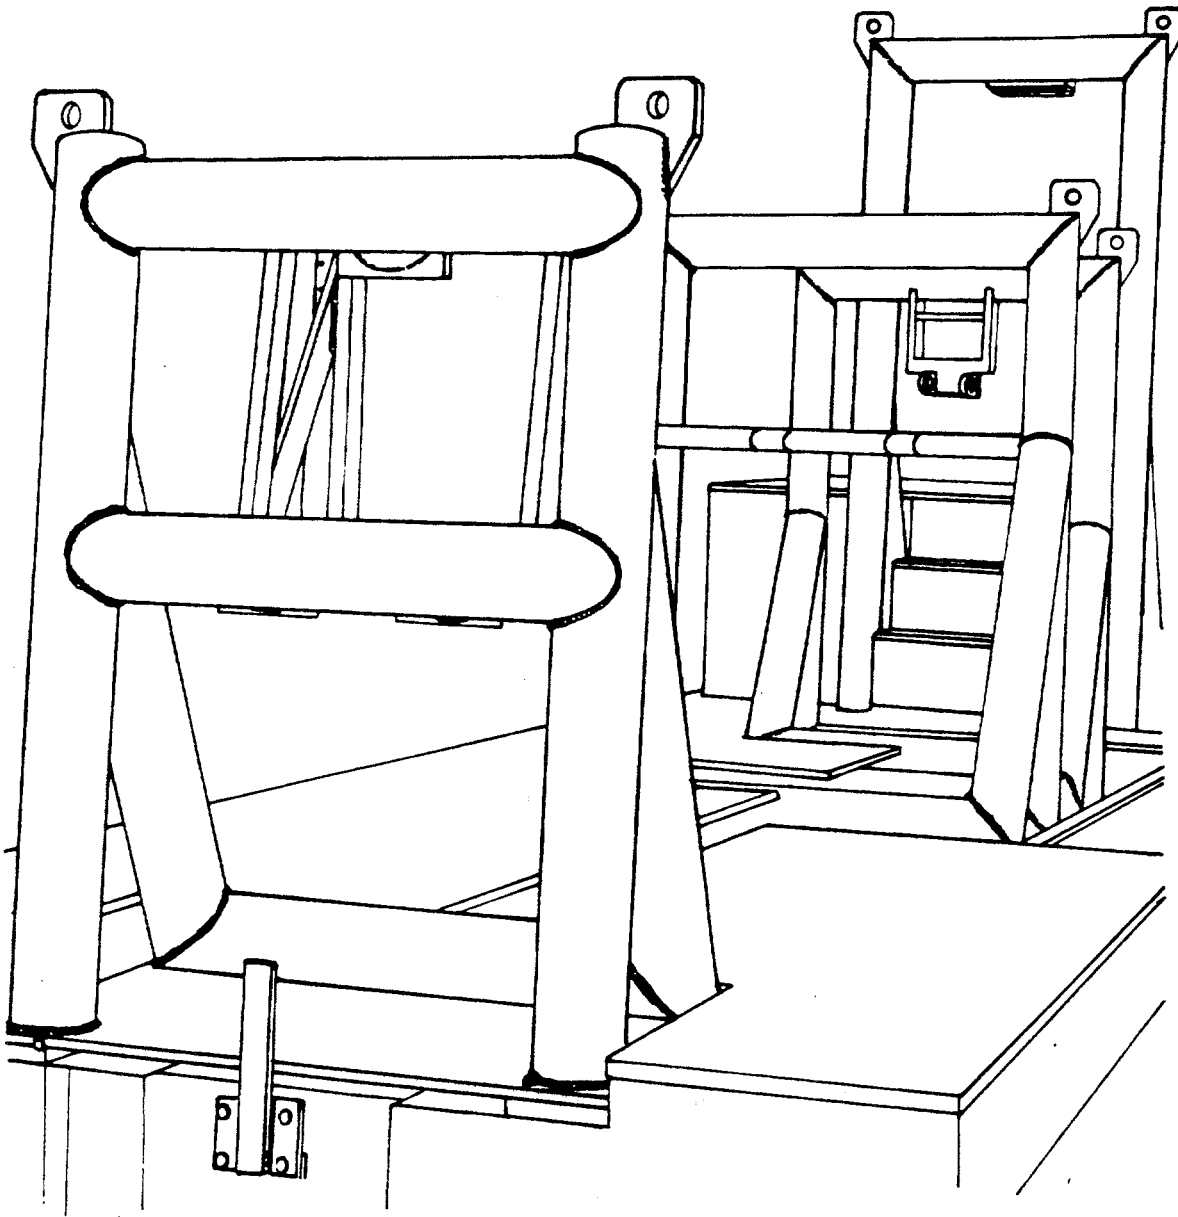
UNIVERSAL TAILBOOM HOLDING FIXTURE
